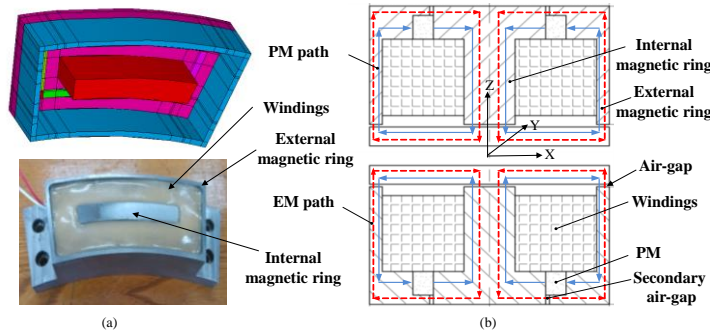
Single axial magnetic bearing, (a) configuration, (b) magnetic path.
